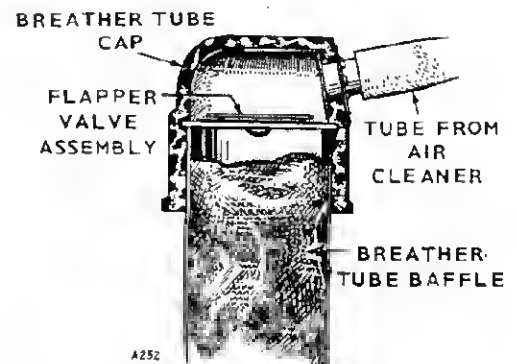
CRANKCASE BREATHER MCCK SPEC A ONLY
